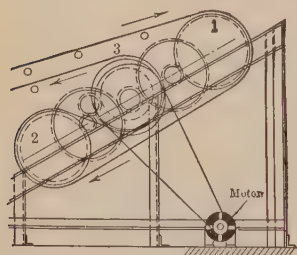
Three-pulley Drive with Compensating Gearing.
